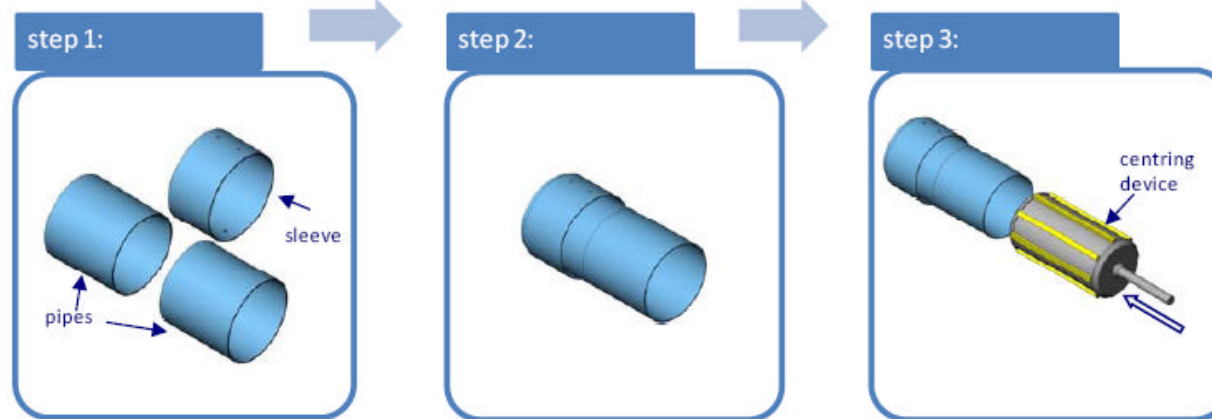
Concept for pipe joining using adhesive bonding (step 1 - 3)
